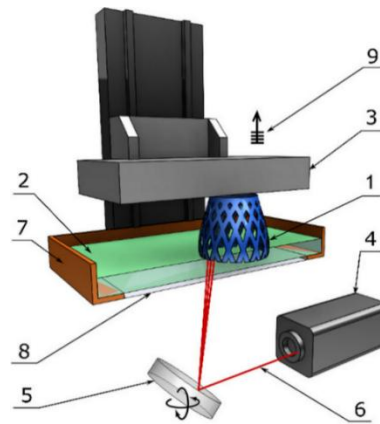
Components of A typical SLA machine: 1) Printed part, 2) liquid resin, 3) building platform, 4) UV laser source, 5) axis scanning mirror, 6) beam, 7) resin tank, 8) window, and 9) elevation layer-by-layer, taken from [53]
